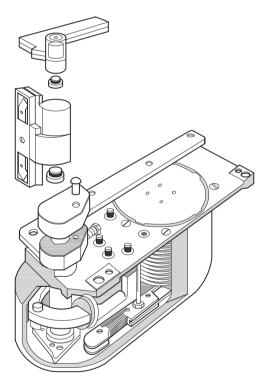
Heavy Duty Floor Closer (Source: Courtesy of Rixson®)
